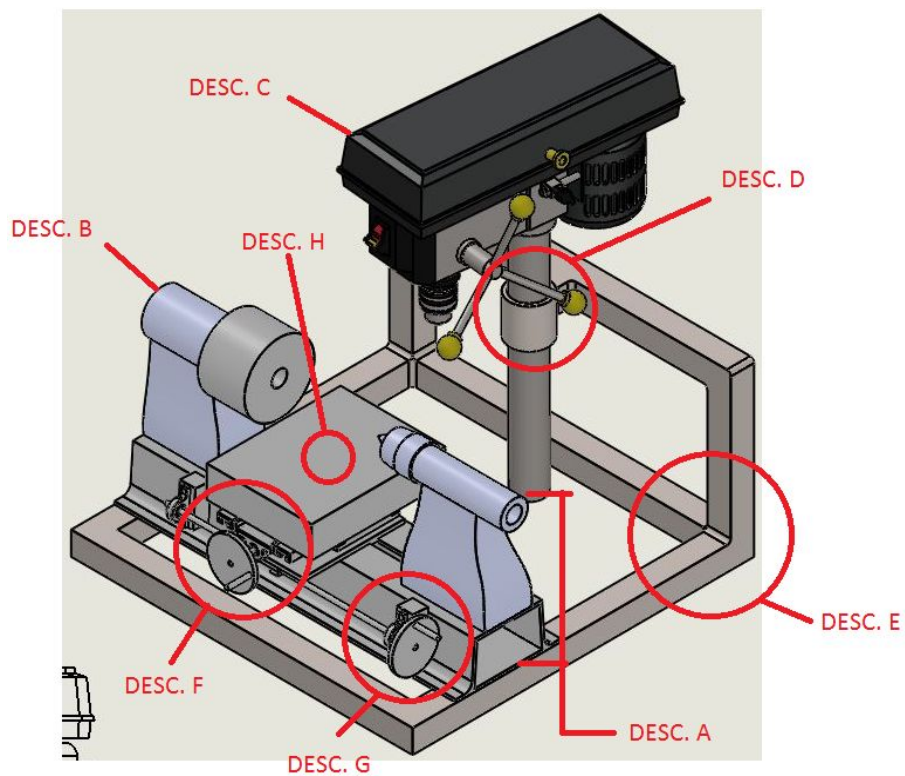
Revised Preliminary Embodiment Assembly with Description Callouts
